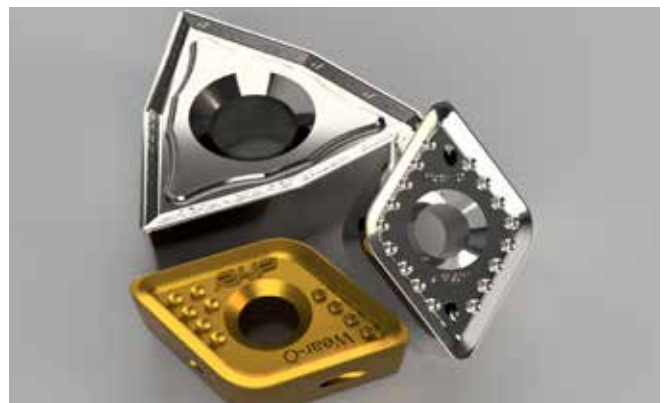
Geometries of cutting tools that can be realized with 3D shaping technologies.
